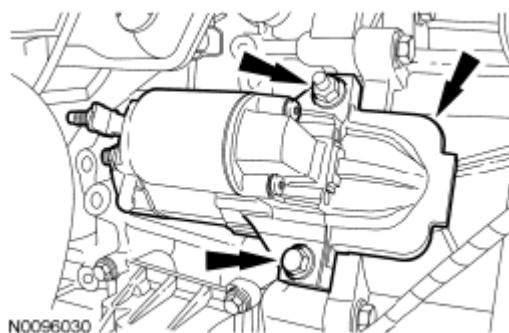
Locating Bolt, Stud Bolt & Starter Motor
